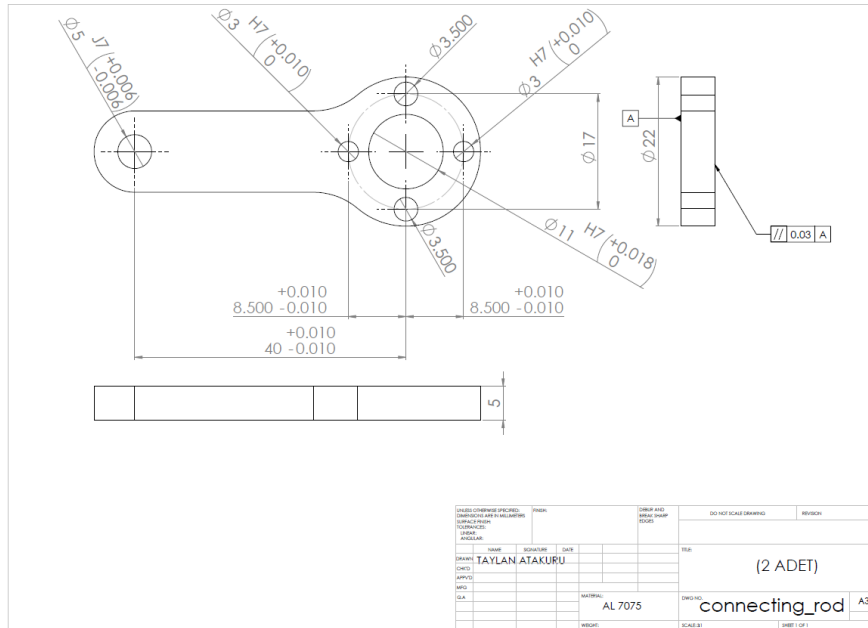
Technical drawing of the connecting rod of the slider-crank mechanism.
